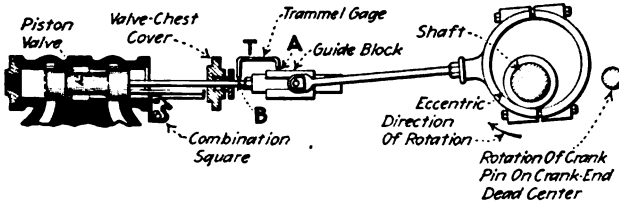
“Trying” the lead at the crank end of the piston-valve cylinder (engine on crank-end dead center).
